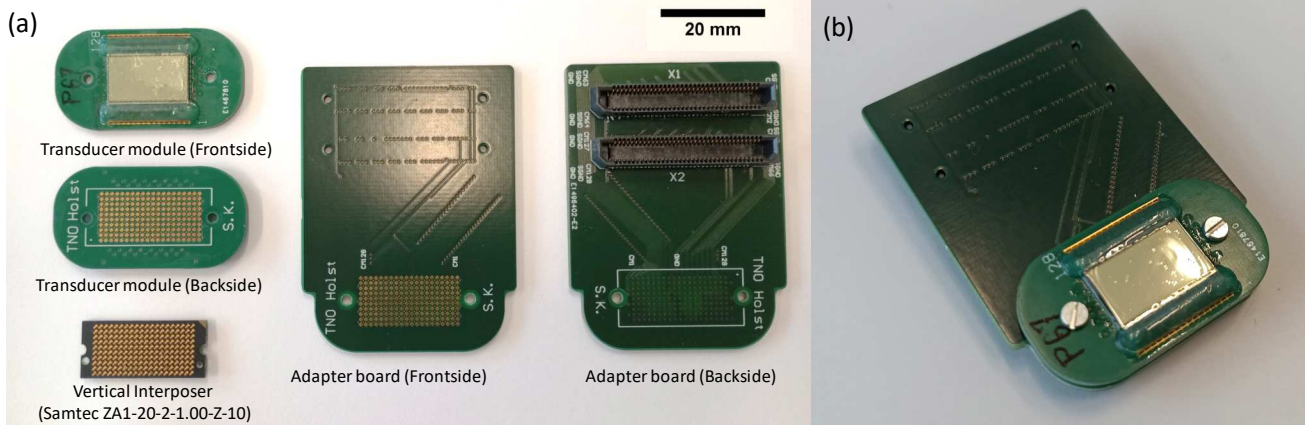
(a) The individual components (transducer module, adapter board, and the vertical interposer) used to make the ultrasound image. (b) The assembled transducer module ready for imaging.
